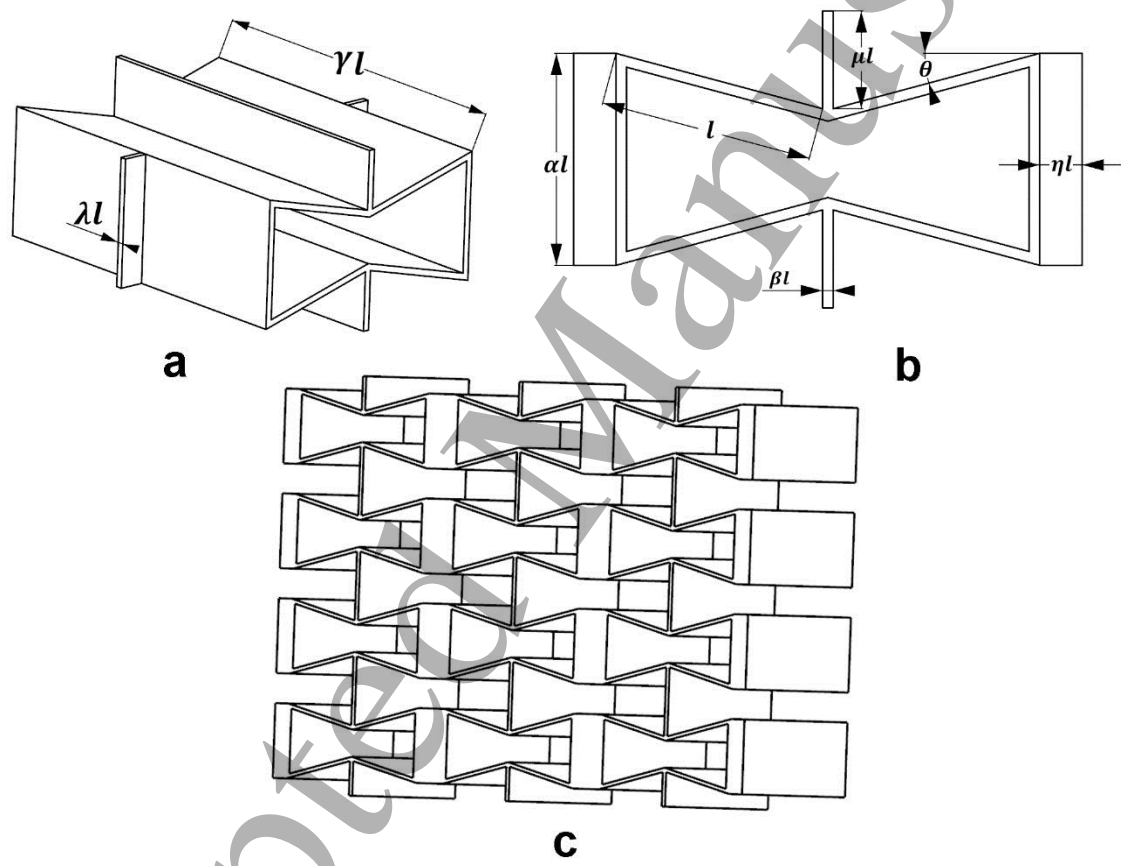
Re-entrant hexagonal unit cell a) iso-view b) front-view c) manufactured sample.
